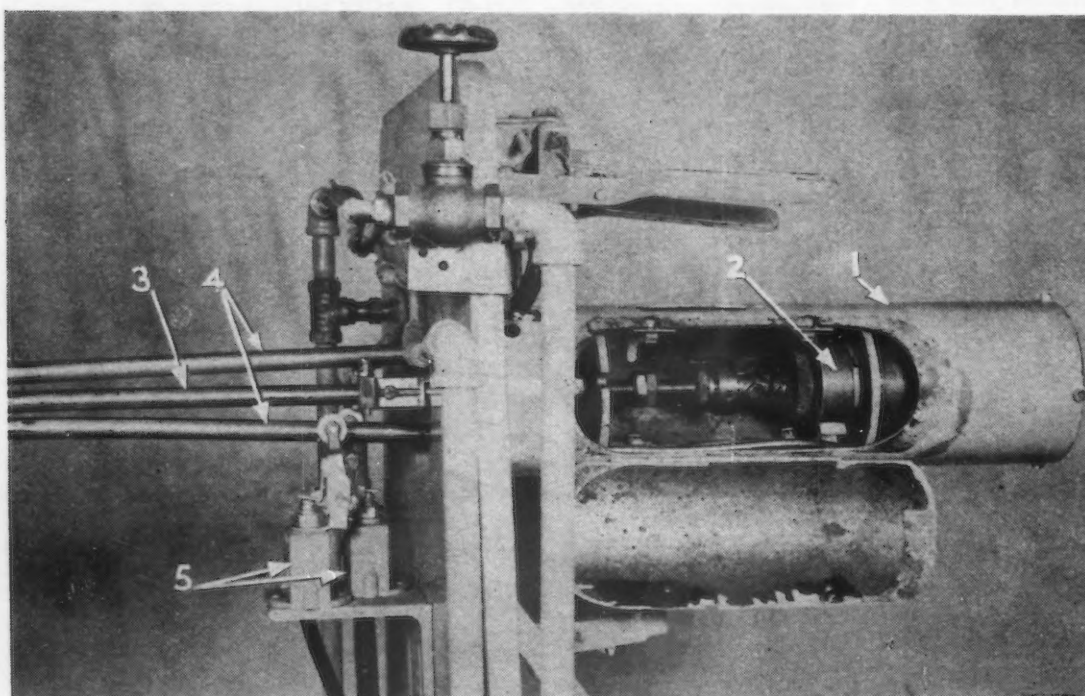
Internal electrode wedge operating cylinder, showing: 1—Cylinder case; 2—double acting air cylinder; 3—wedge actuating rod; 4—inner electrode support and coolant tubes; 5—sequence micro-switches.
